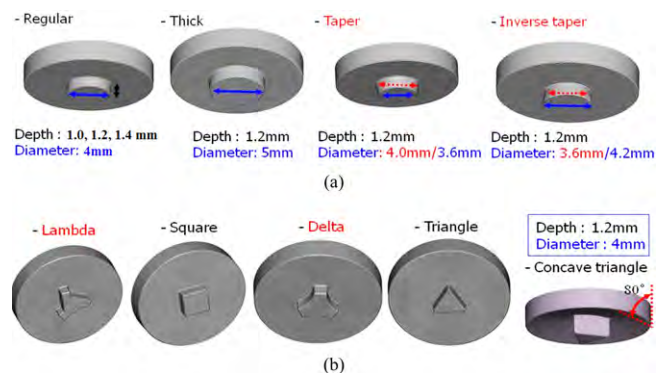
Pin geometries, (a) conventional tool, (b) unconventional tool with 12 mm shoulder diameter.
